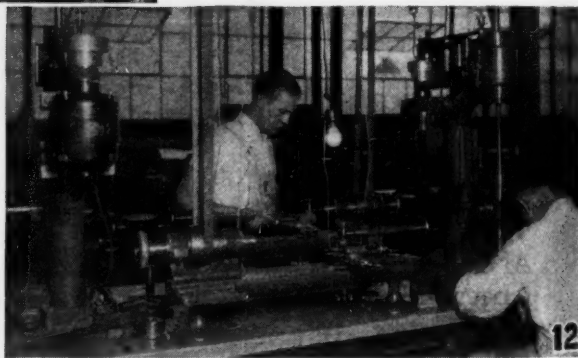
Boring a frame for a scroll-bending machine. Fig. 12—These two Canedy-Otto drills and two bench lathes form a handy unit.
